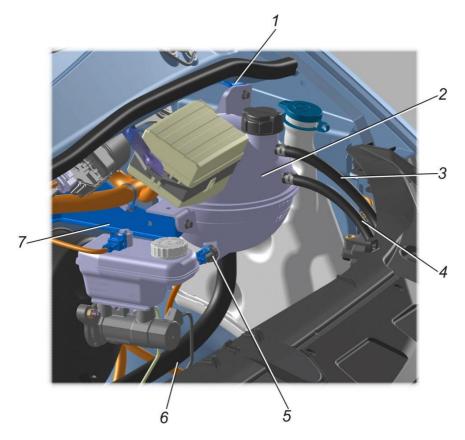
Expansion tank installation: 1 – front end panel extension; 2 - expansion tank; 3, 4, 6 – hoses; 5 – coolant level sensor; 7 – expansion tank bracket
